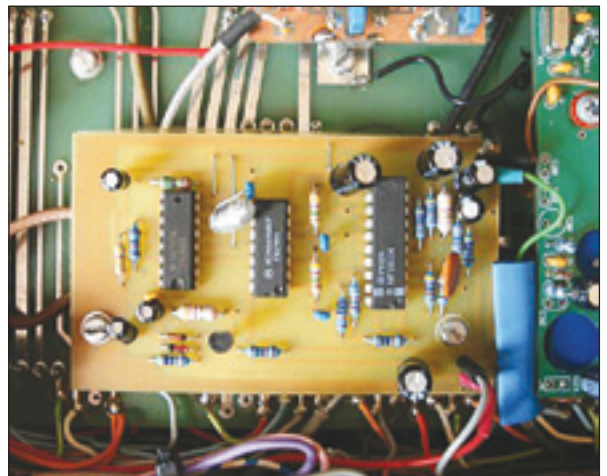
Notch filter PCB assembled on to the parent board of the TR-7.
